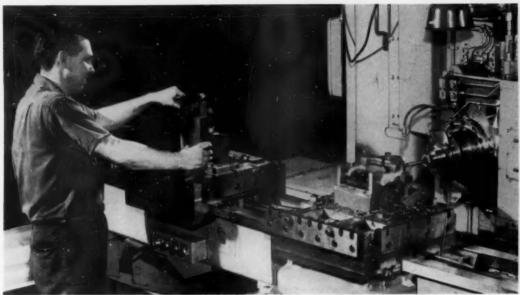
The pallet enables setup of the next workpiece while the first workpiece is being machined. When the first piece is finished, the new job is shuttled into work position with a minimum interruption of machining.
